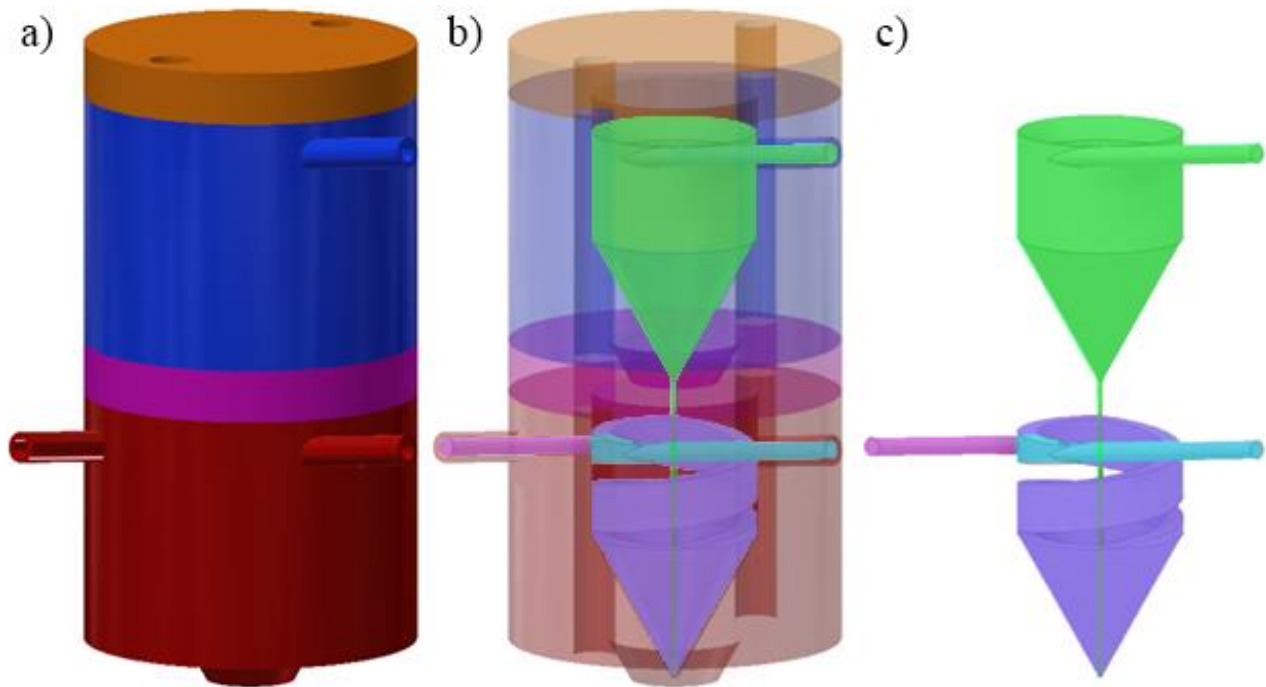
Flow Path Through Printhead Assembly a) Printhead Assembly b) Flow Path Through Assembly c) Flow Path
